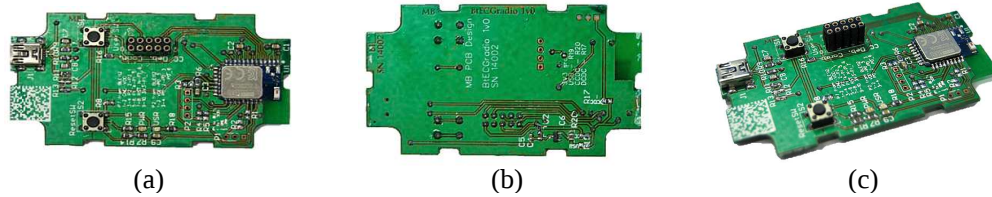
(a) Top, (b) bottom and (c) side view of BtECGradio module device.
